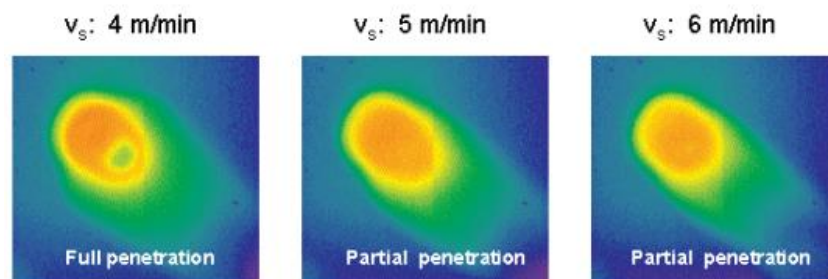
Full and partial penetration during laser beam welding with ND-YAG lasers (Beersiek, 2001)
